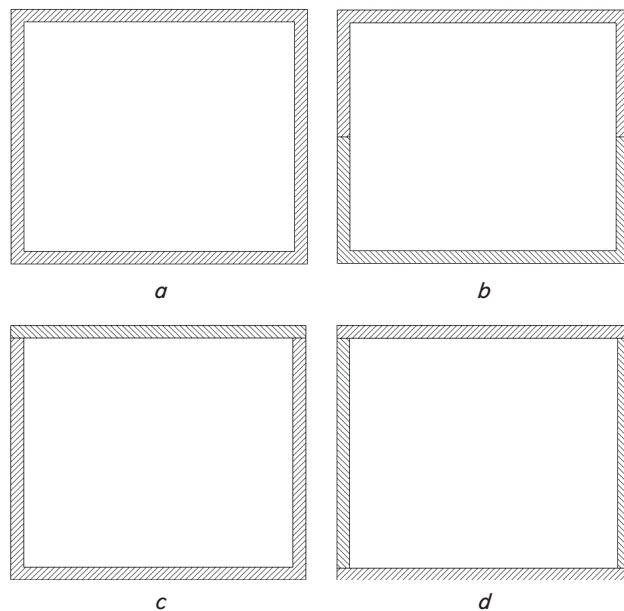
Fabrication variants of the girder beam in a freight car: a – rectangular cross-section pipe; b – trough profiles; c – U-shaped profile closed by a horizontal sheet; d – sheet structure
